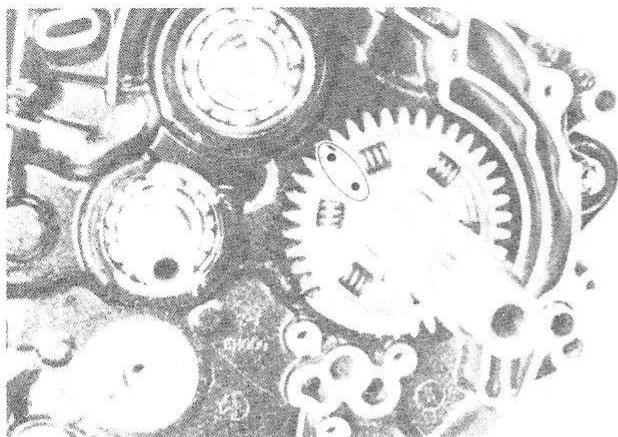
B.47 The punch marks (circled) on the gear and hub must be aligned (Sec 24)
